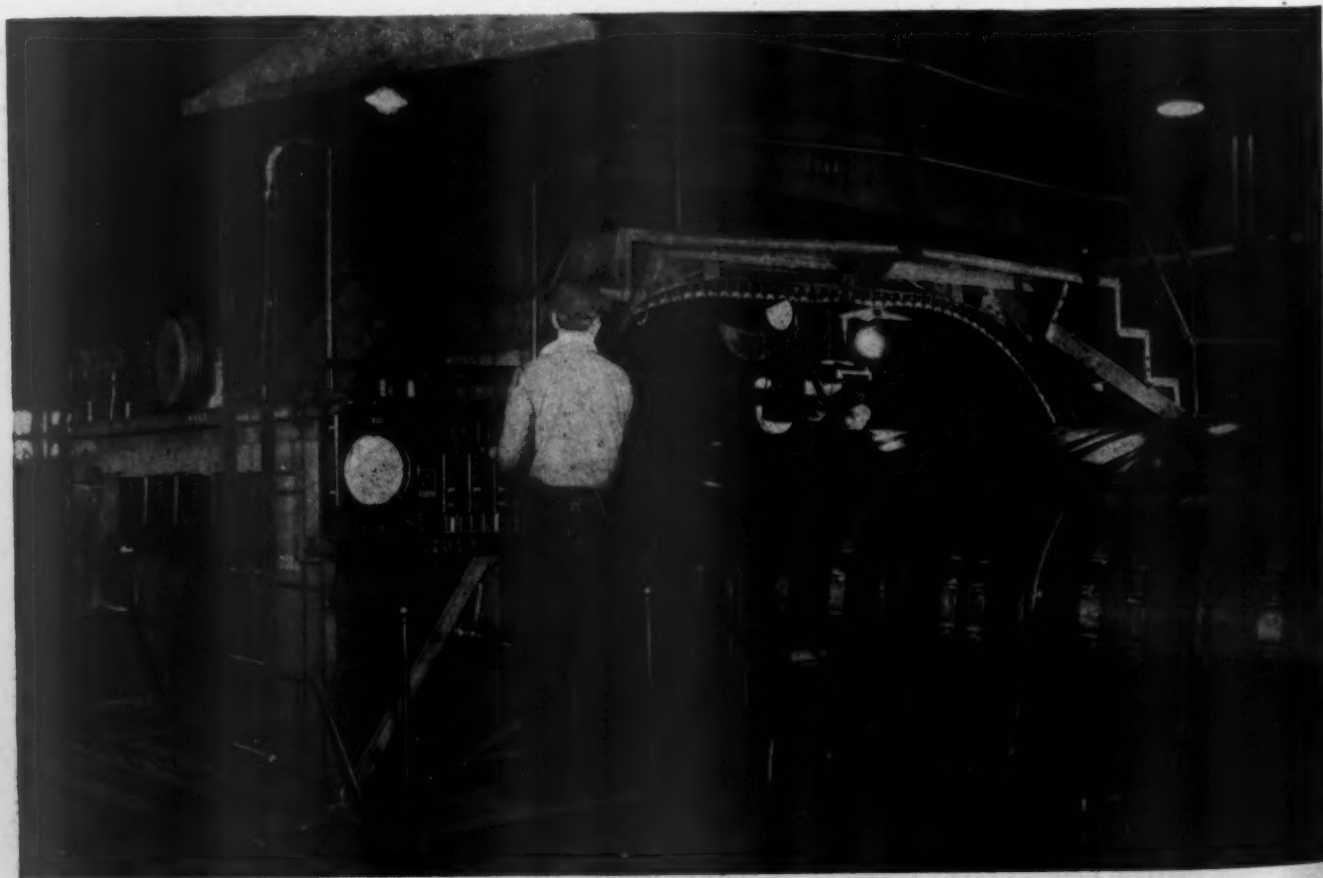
Spot welding the roof sheets to the carlines using roller-type electrodes
